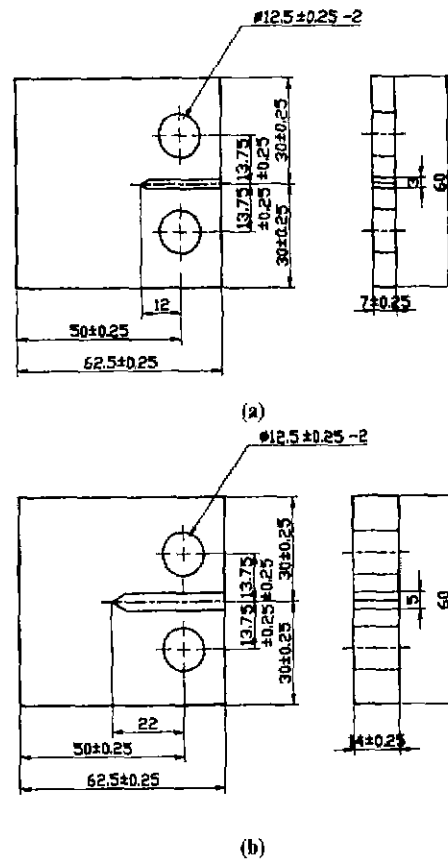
Specimen geometry for (a) fatigue crack growth (b) fracture toughness
